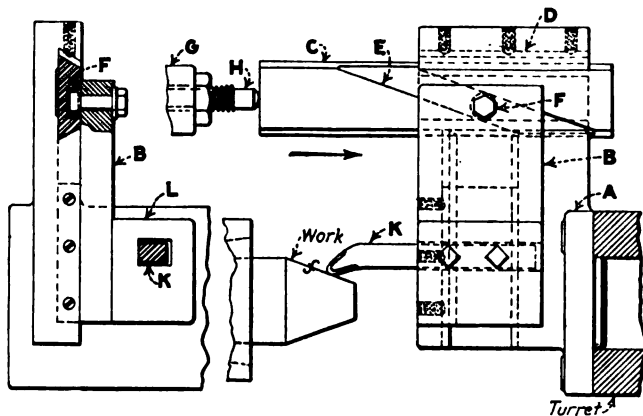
SPECIAL ATTACHMENT FOR TURNING TAPERS
